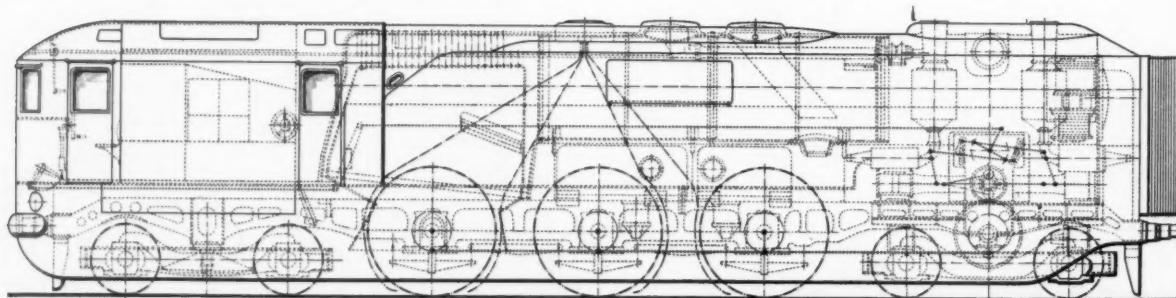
Design for 4-6-4 superheated, four-cylinder compound express tank locomotive enclosed high-speed engine and jackshaft drive for speeds of 150-170 km. (93.2-105.6 miles) an hour
